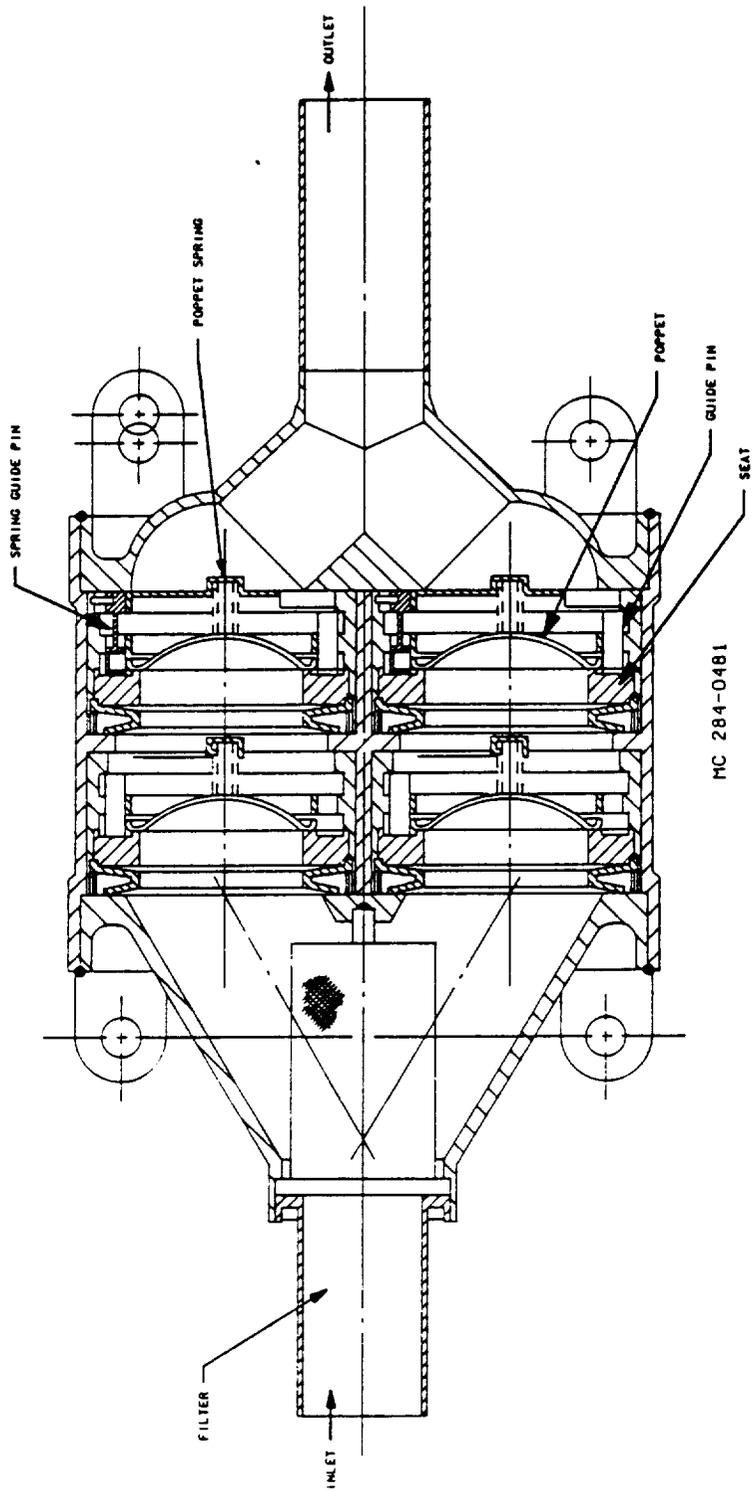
QUAD CHECK VALVE ASSEMBLY
